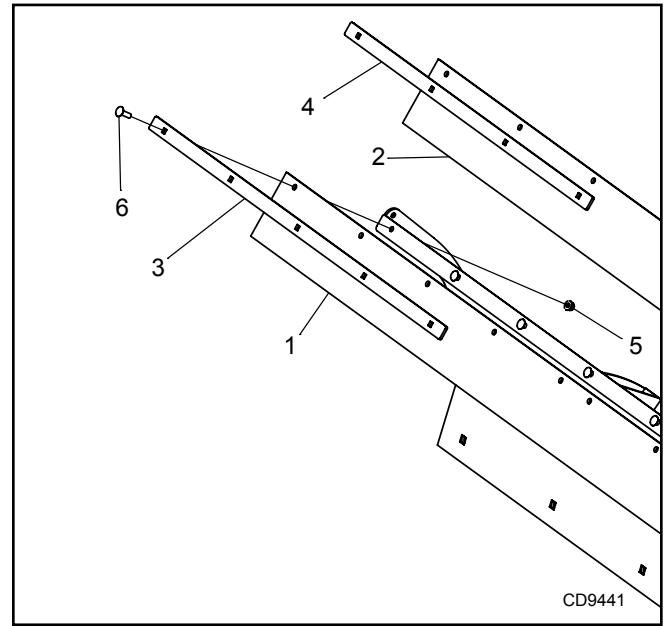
Loader Front Blade Rubber Deflector Kit Installation
